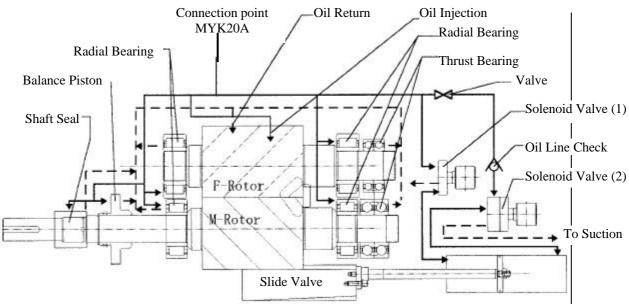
Lubricating Oil Flow, Inside of Compressor.
